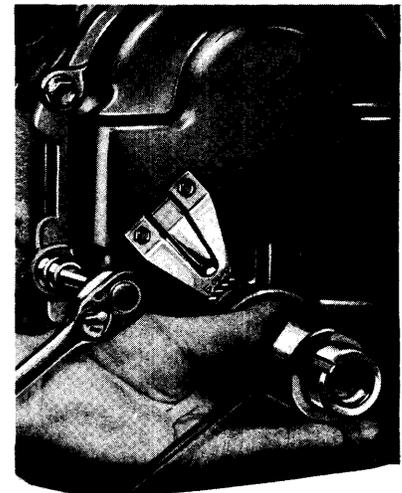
Fuel Pump Eccentric and Front Oil Slinger Installed
